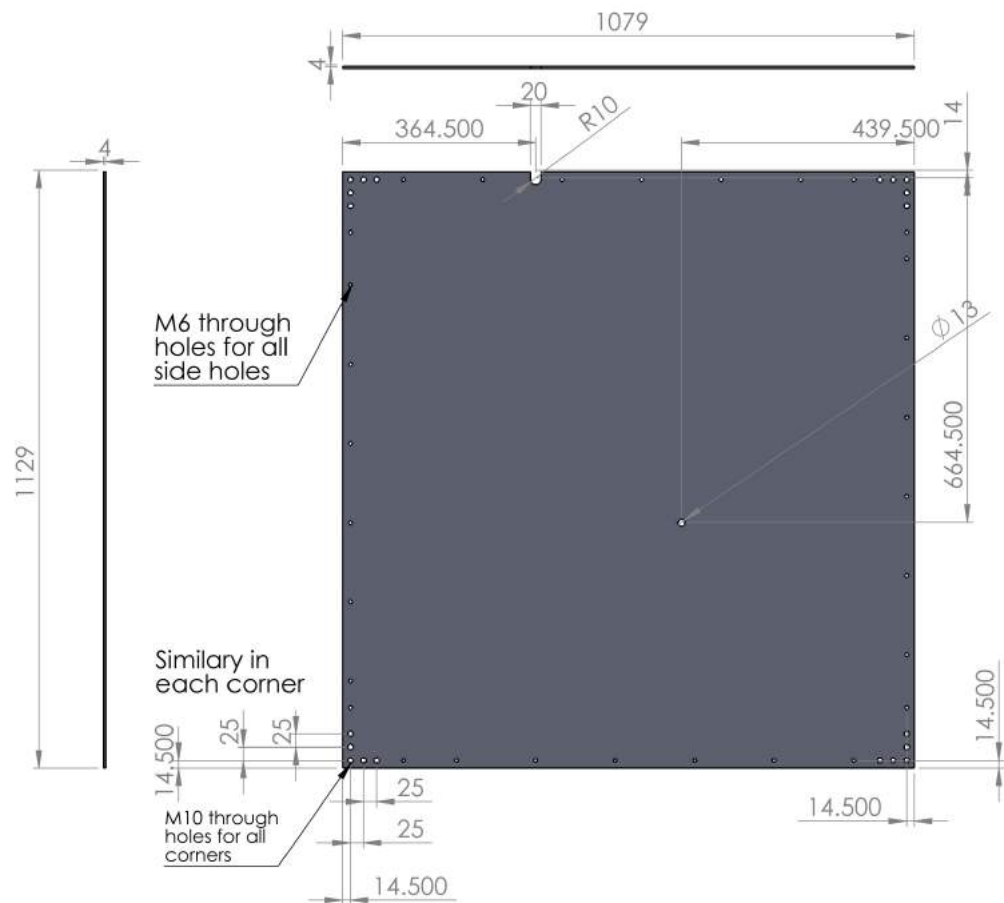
Outside view of the Faraday cage lid showing the slot dimensions so that the ion pump and gauge cables can exit the system and the near-central hole into which a BNC connector is installed for the trap RF connection. The corner holes are larger so that the lid can fit over the heads of the M6 bolts that secure the top frames to the top corners.
